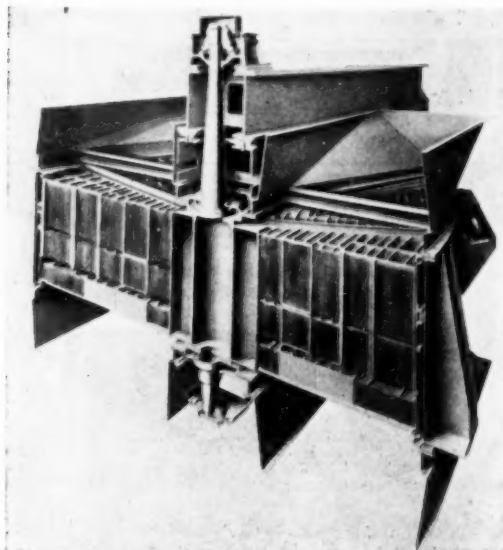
SECTIONAL VIEW THROUGH LARGE-SIZED INVERTED-TYPE HEATER
